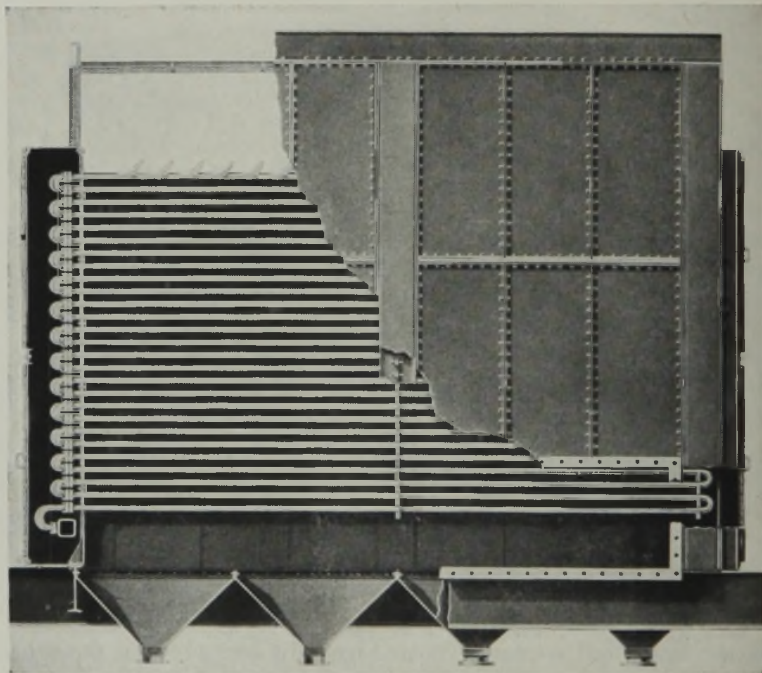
Cutaway view of Babcock and Wilcox return bend economizer.
